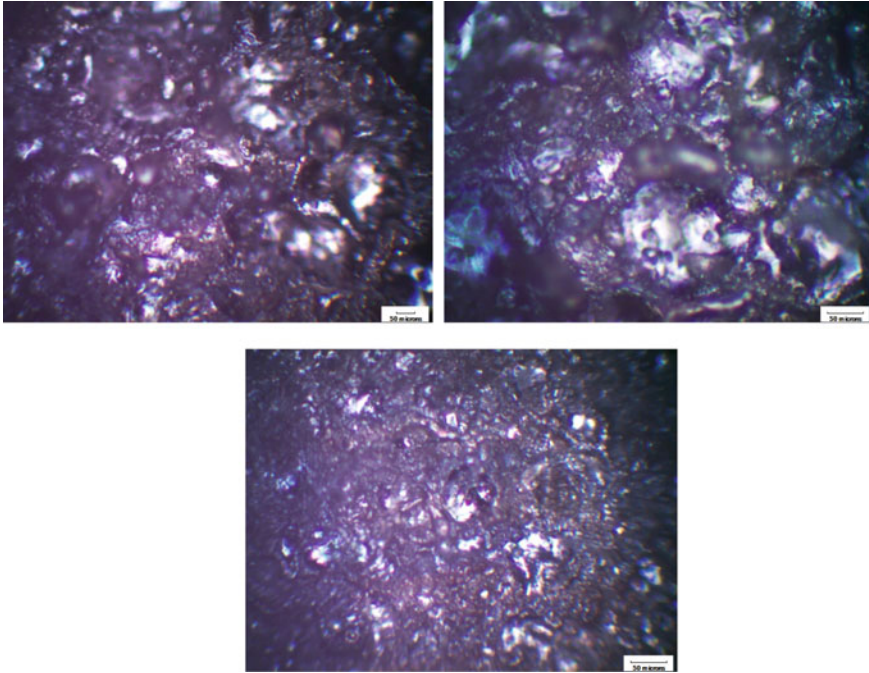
Microscopic images of the machined surface (about 50 μm)
